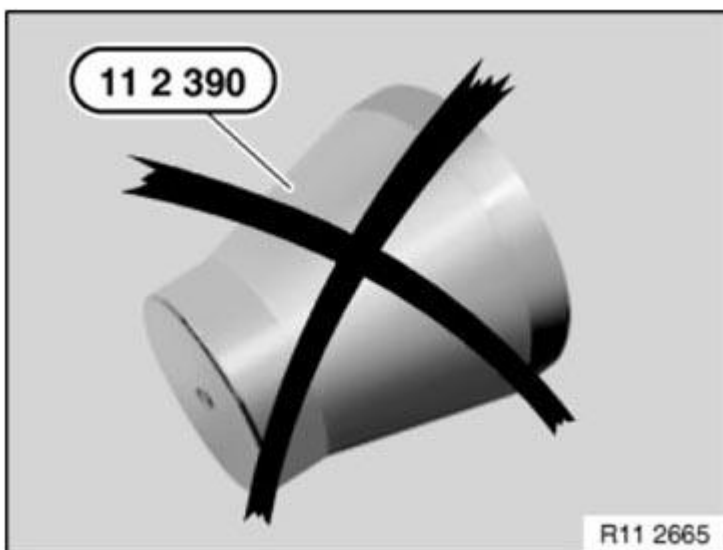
Precaution - Special Tool 11 2 390 Must Not Be Used
